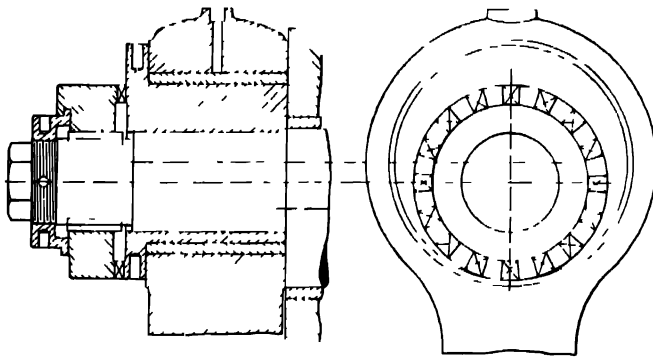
Stroke adjustment for Schuler end-wheel press
